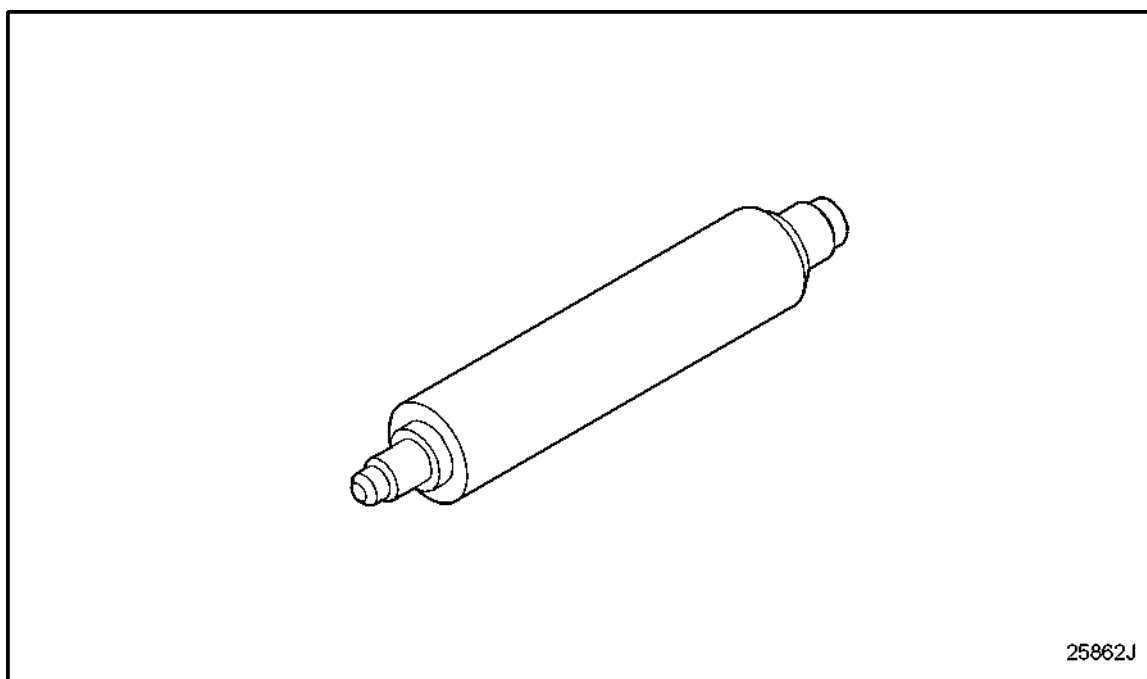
Cover & Spring Housing Remover, J 21068
